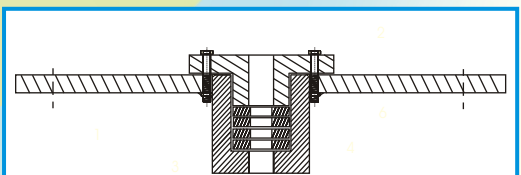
THIRD PLATE ASSEMBLY FOR FORCE LIFT HAND PUMP
